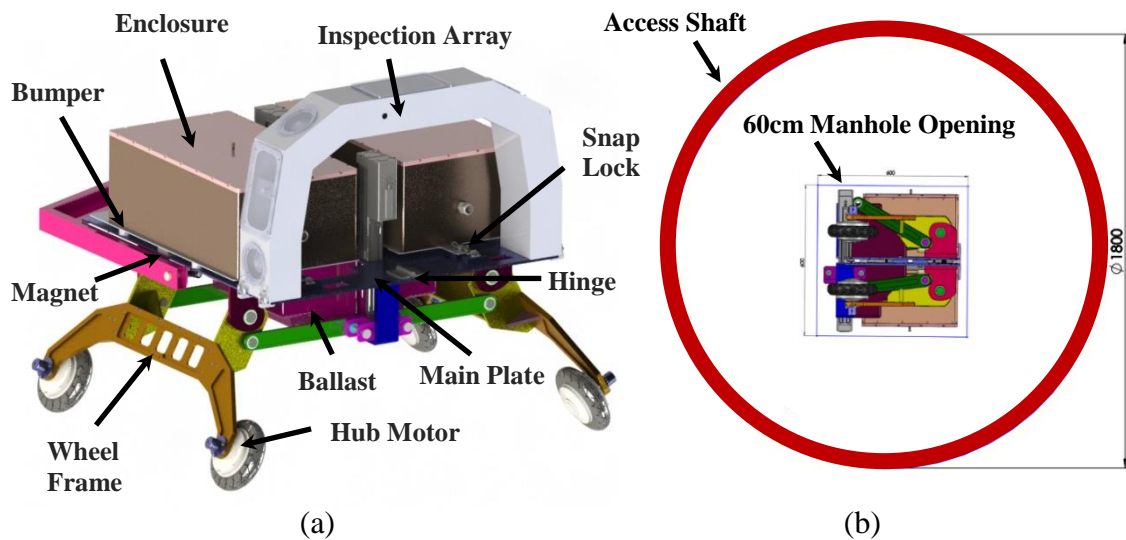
Design of modular robot (a) before disassembly and (b) after disassembly
